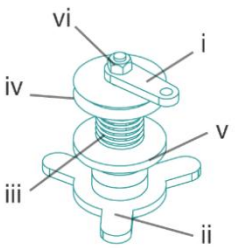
Initial braiding apparatus general arrangement drawing
